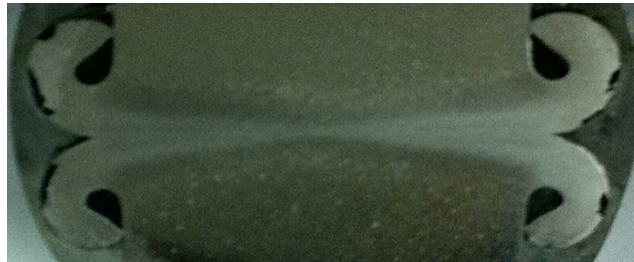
Cross section view of friction weld of Inconel 718 generated with 1500 RPM.
